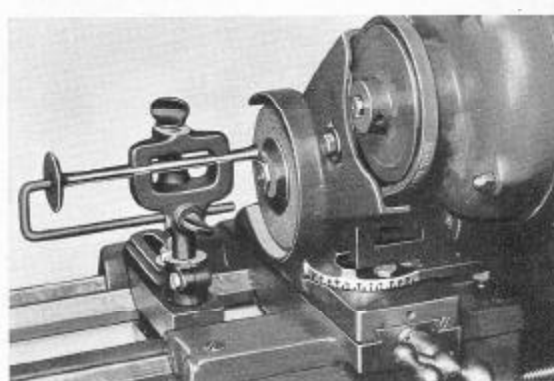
Grinding the End of a Ford Valve Stem. The V-block valve stem clearance grinding fixture shown in the illustration is used for squaring the ends of worn valve stems and for grinding Ford mushroom end valves for clearance adjustment. Fixture clamps on the inner ways of the lathe bed.
